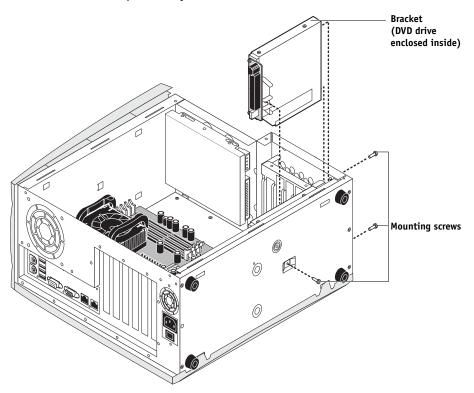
Removing/replacing the DVD drive and bracket
